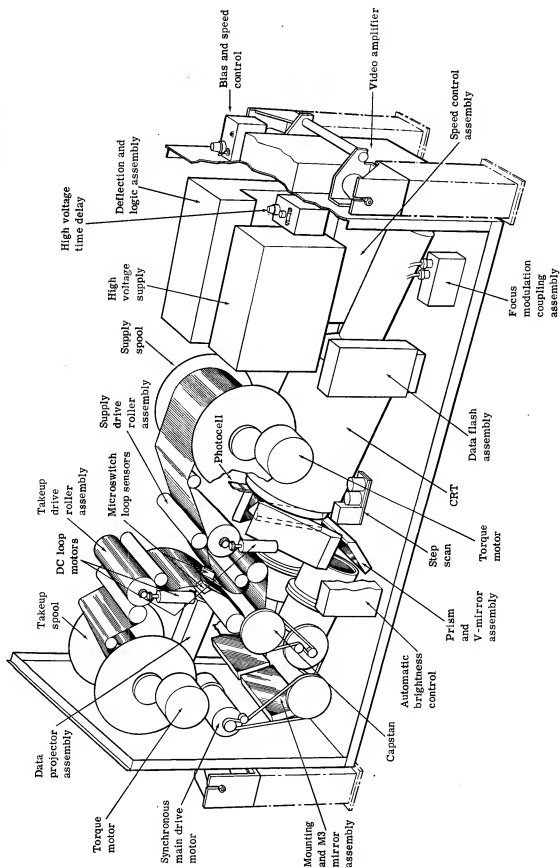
Locations of principal assemblies and components (cutaway perspective drawing)
